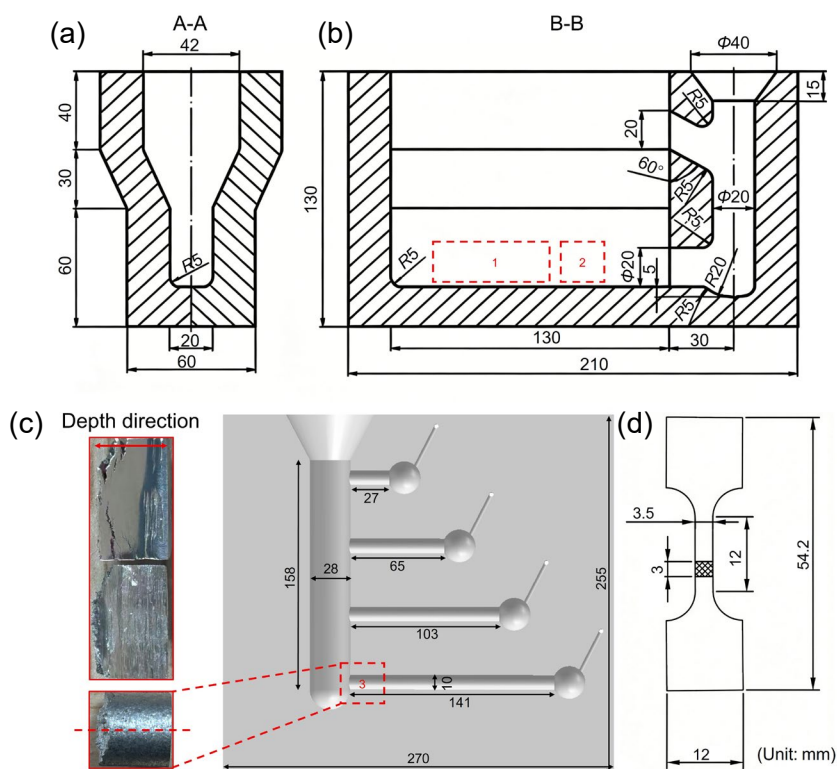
Shape and size of metal mold (a-b), hot tearing test mold and sampling location diagram (c), and shape and size of tensile specimen (d)
